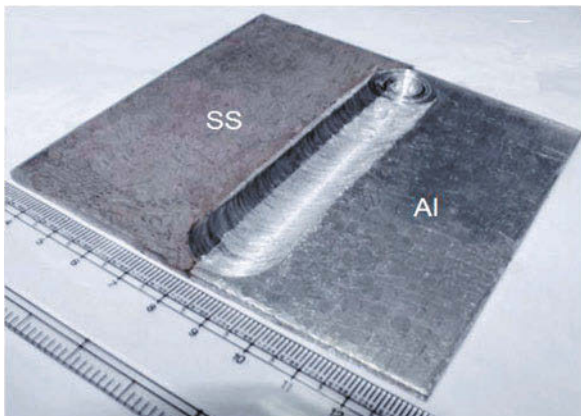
Photograph of a defect-free butt joint produced in AISI 321 and AA 2219 sheets.
